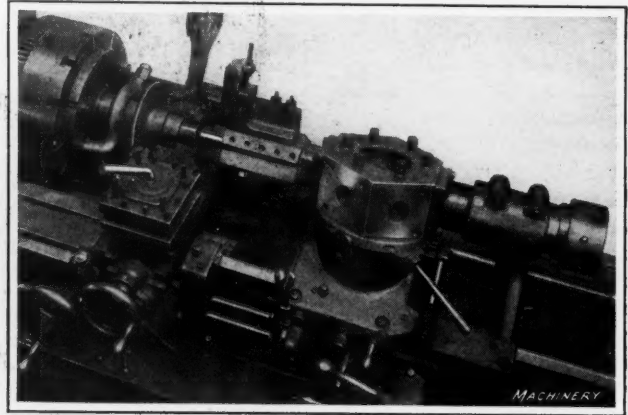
Machine set up for performing Second Operation on Wheel Hub
